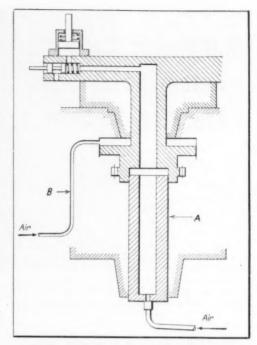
Diagrammatic sectional view of the table, showing part of the compressed air system for operating the work fixtures, also clamping and relieving the table
